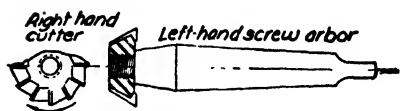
Single Angle, Threaded Hole Milling Cutter and Screw Arbor.
